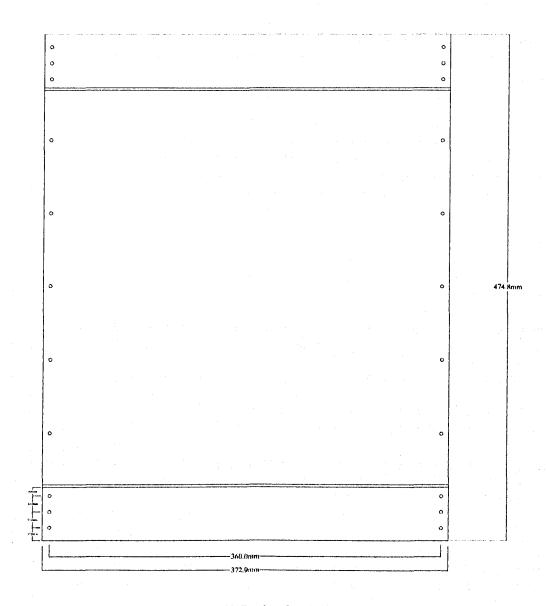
Design for the bottom half of the M2 Control Surface box. Dimensions in millimetres.
